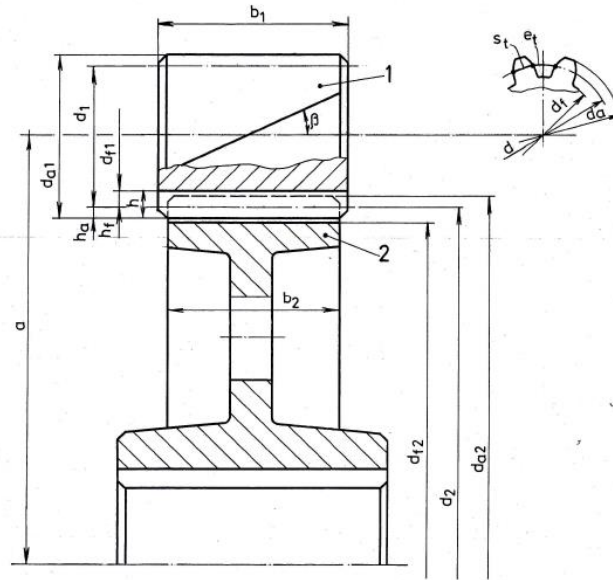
Some geometrical elements of the gear wheels with helical teeth, involute profile, and unmodified toothing
